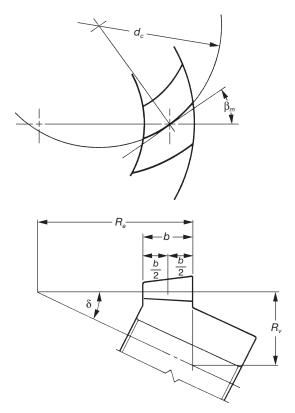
Spiral Bevel Gear (Left-Hand)
